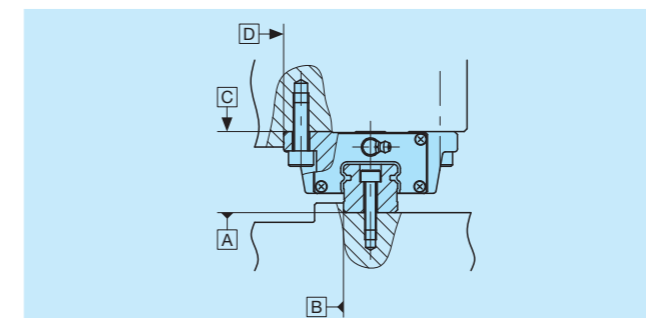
Reference mounting surfaces and general mounting structure of Linear Way
